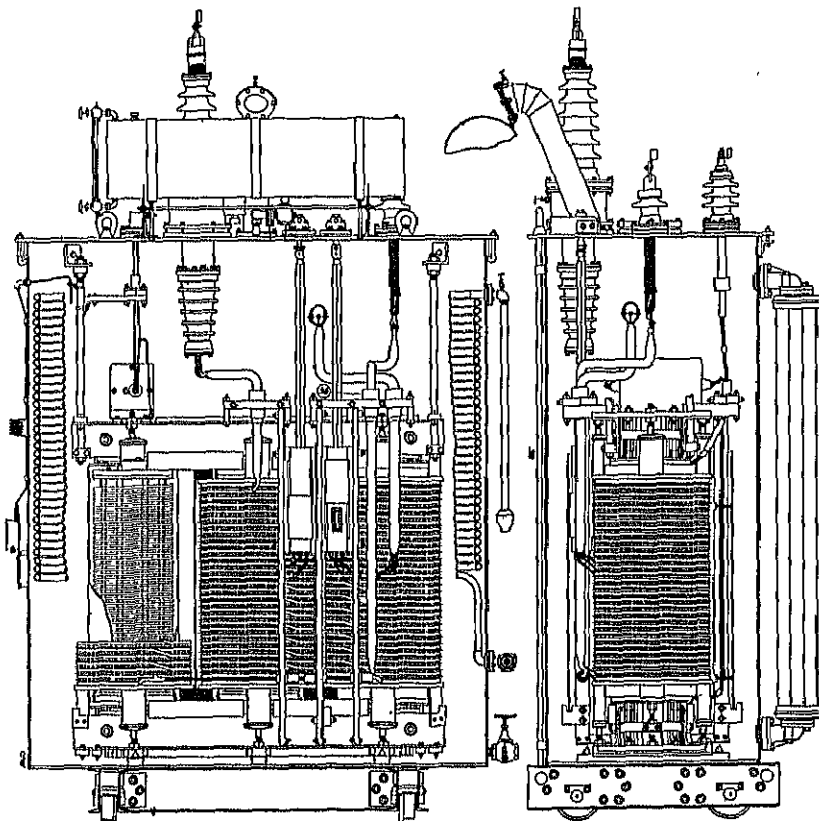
Sectional assembly drawing of three-phase transformer oil and water cooled.
